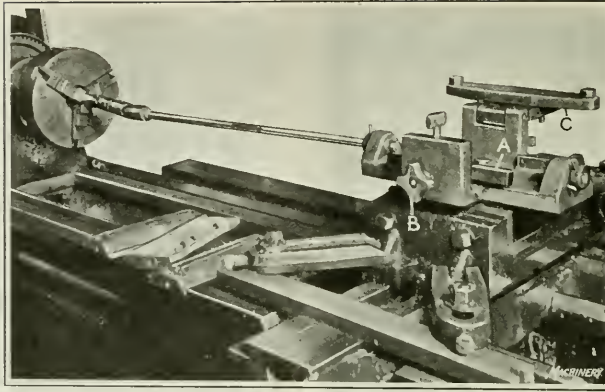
Lathe set up for line-reaming Valve Follower Covers
